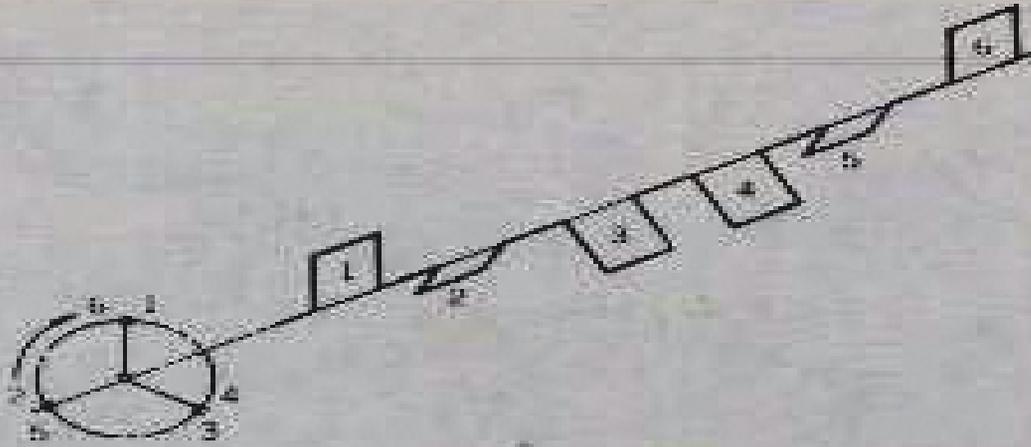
Crankshaft for a six-cylinder engine.
